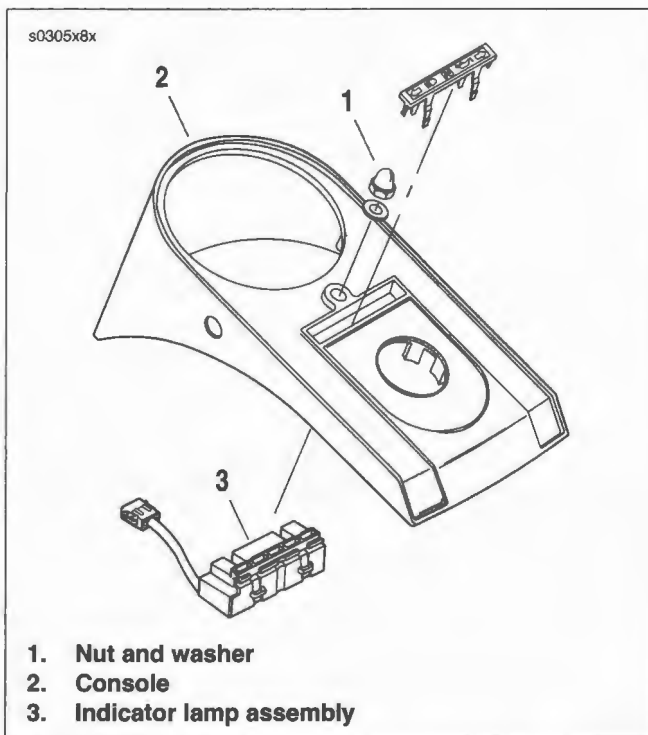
Indicator Lamp Assembly: All But FXSTD
